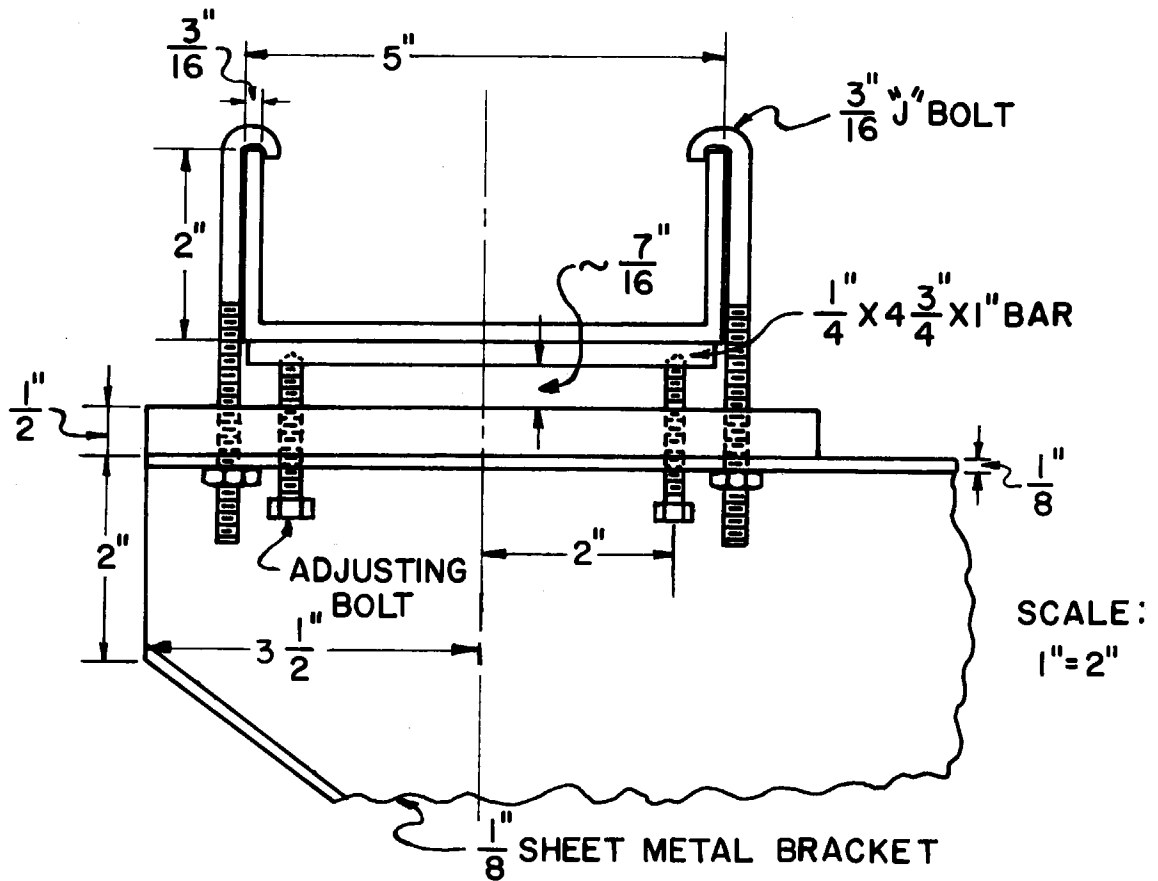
Drawing of cross section of channel at a station with a supporting bracket
